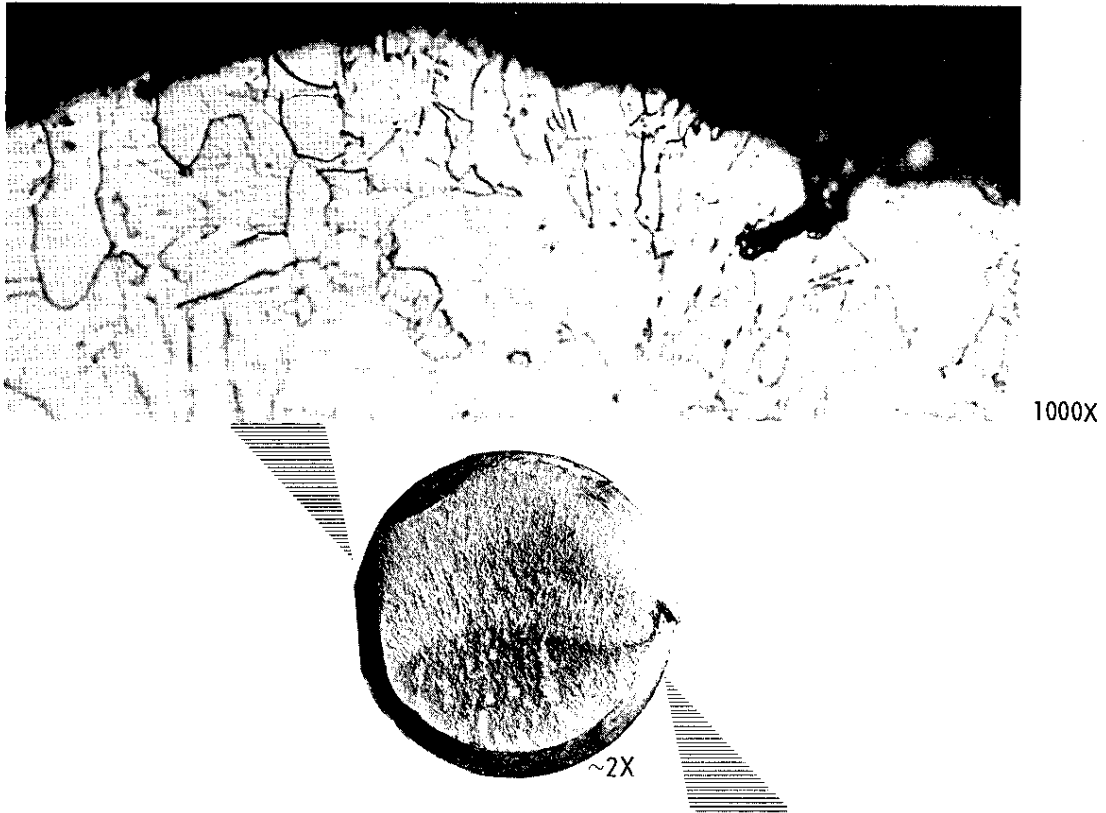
FRACTURE SURFACES OF FAILED 5/8-INCH BOLTS
